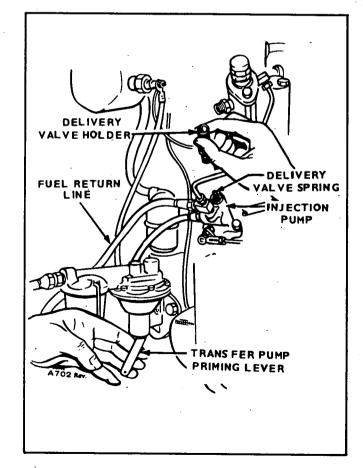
LOOSENING DELIVERY VALVE HOLDER
